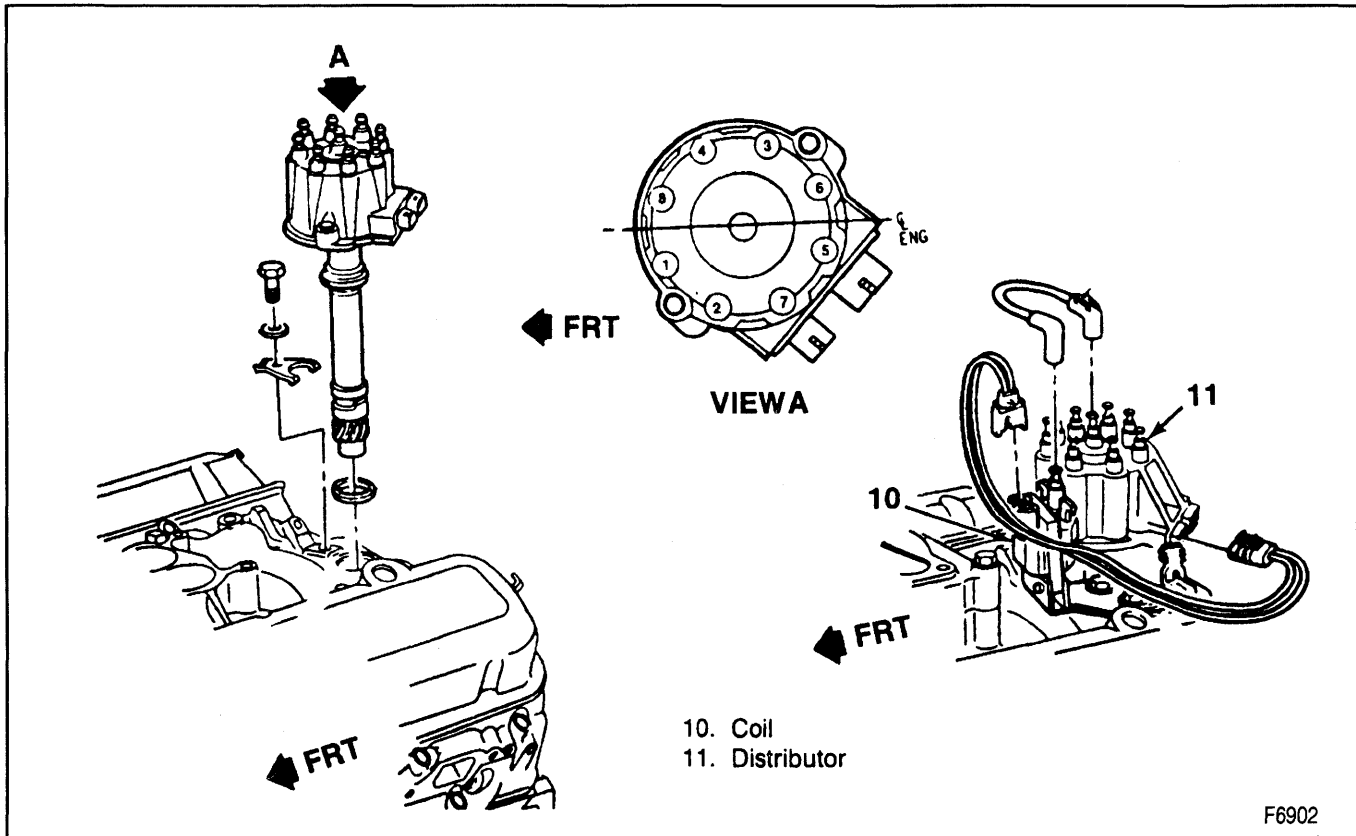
Distributor and Ignition Coil (7.4L Engine)
